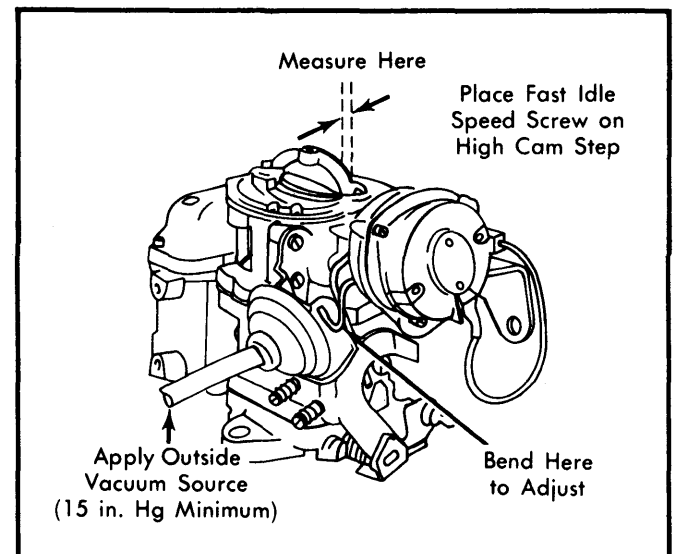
Adjusting Initial Choke Valve Clearance (Choke Pull-Down)
